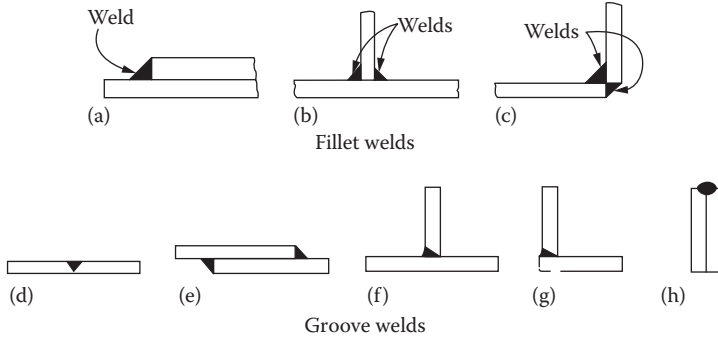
Types of welded joints: (a) lap joint, (b) tee joint, (c) corner joint, (d) butt-joint, (e) lap joint, (f) tee-joint, (g) corner joint, and (h) edge joint.
